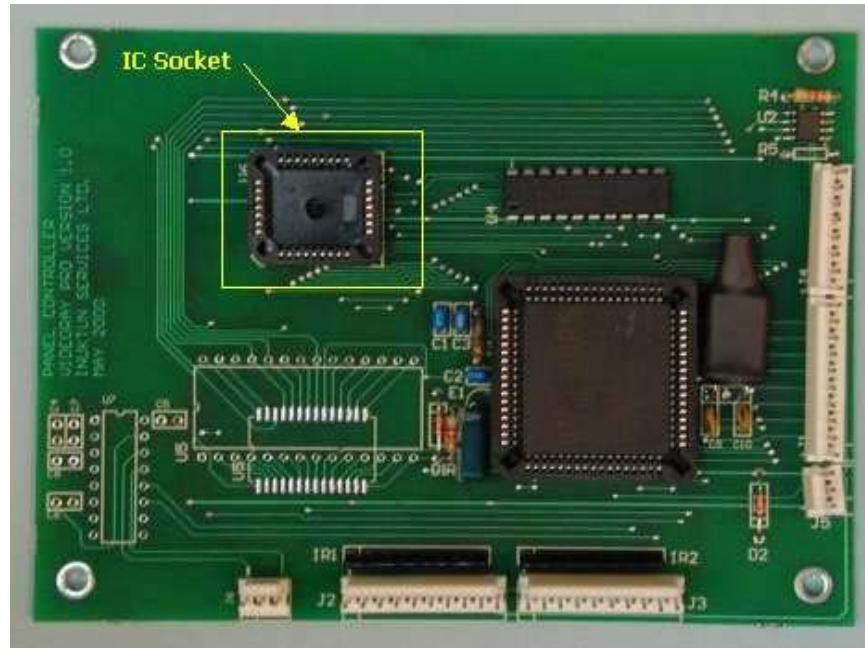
Shows the IC Socket on the Panel Controller PCB
